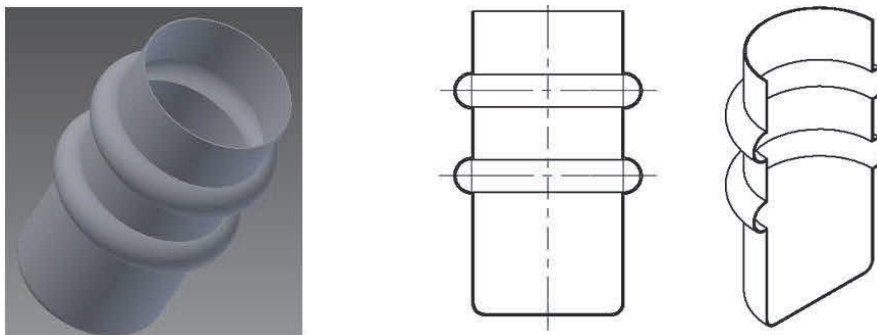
Drawn workpiece with two circumferential rings (left) and sketch of the drawn workpiece with two circumferential rings (right)
